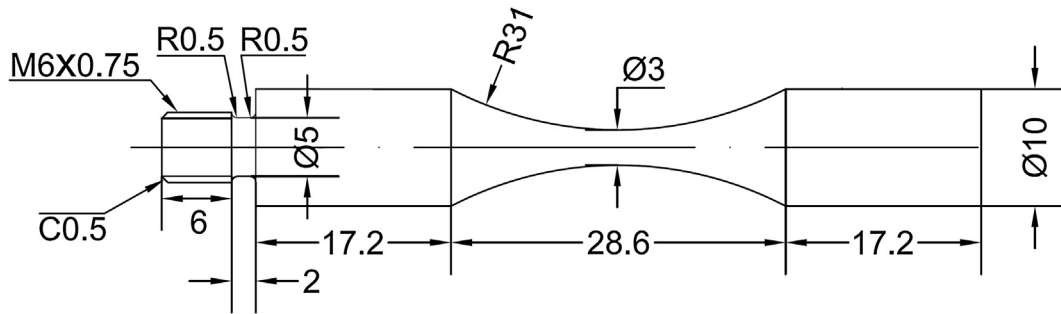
Shape and dimensions (in mm) of specimens for fatigue test.
